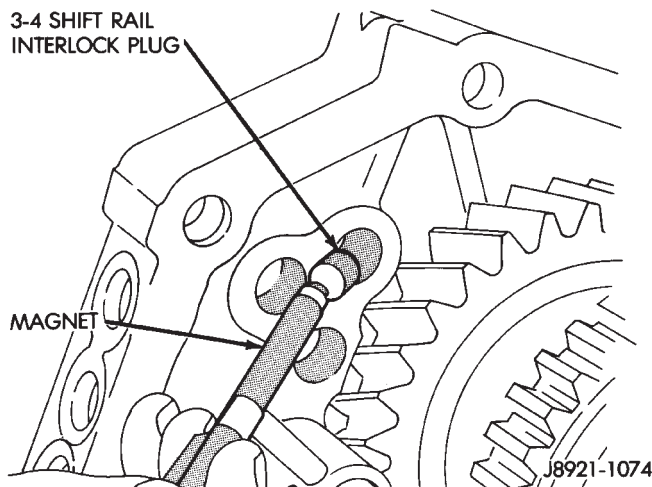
Removing 3-4 Shift Rail Interlock Plug
